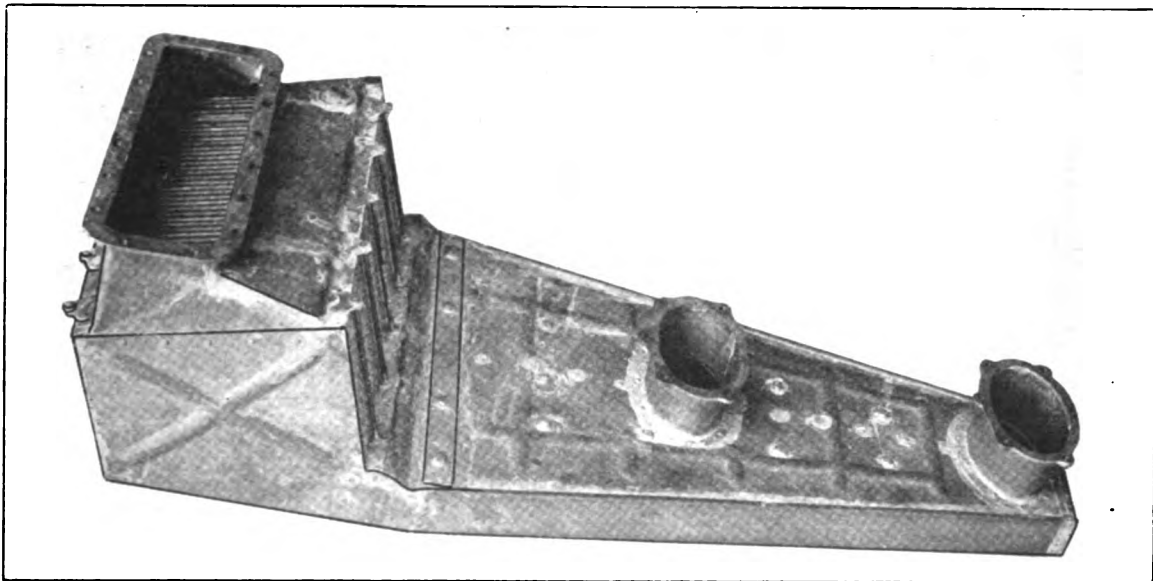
Large honeycomb air cooler—three-fourths bottom view.
